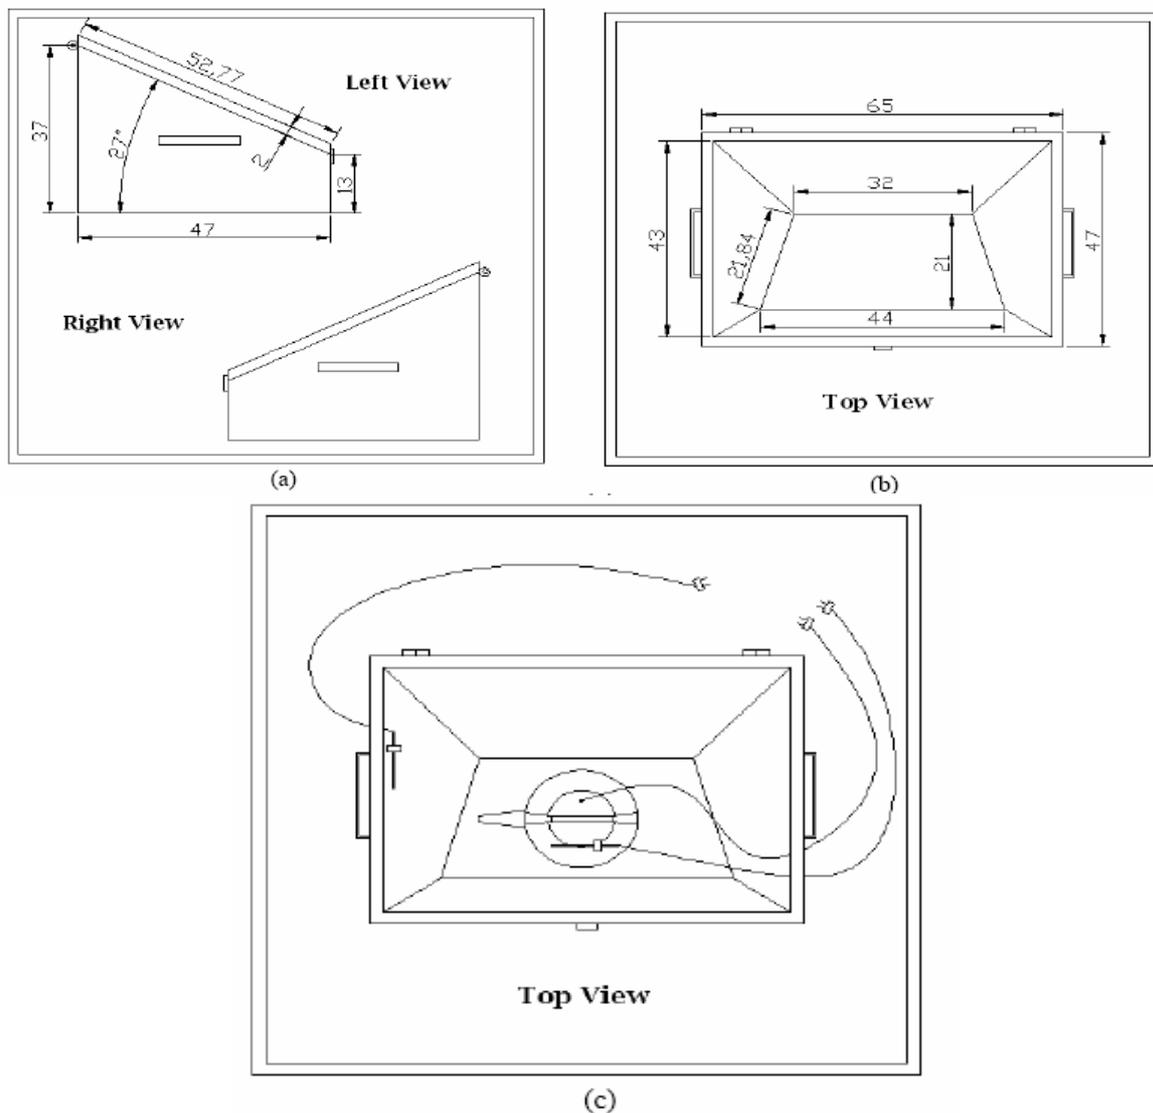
Three dimensional views of the designed solar cooker, (a) and (b) are cooker dimensions in cm, and (c) thermocouple connections in the cooker
